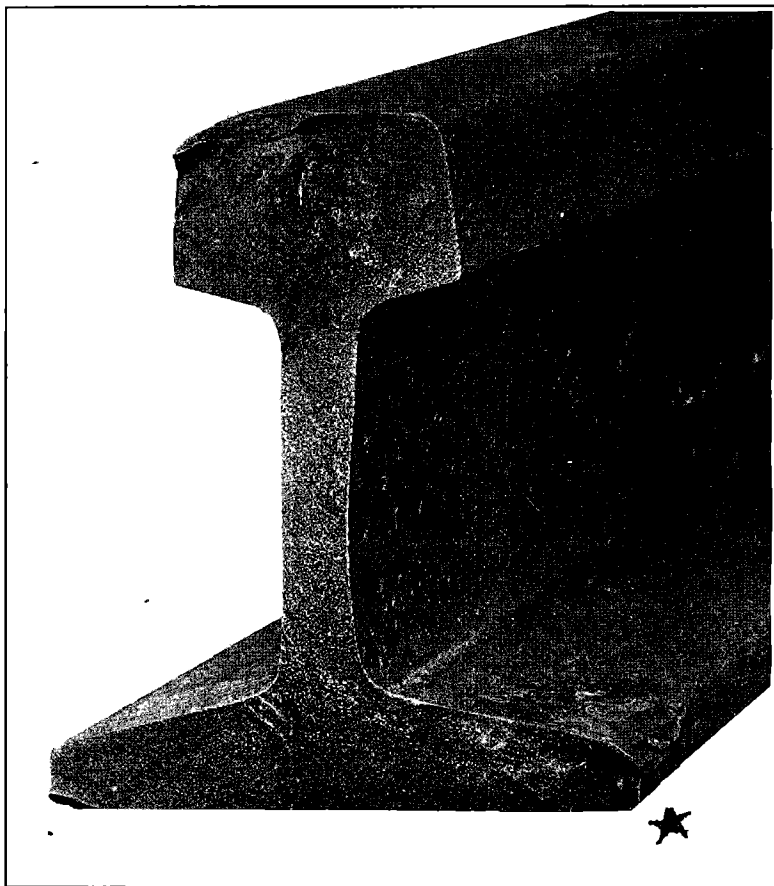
Fracture of a 90-pound Bessemer rail Illustrating a fracture caused by injured flange
